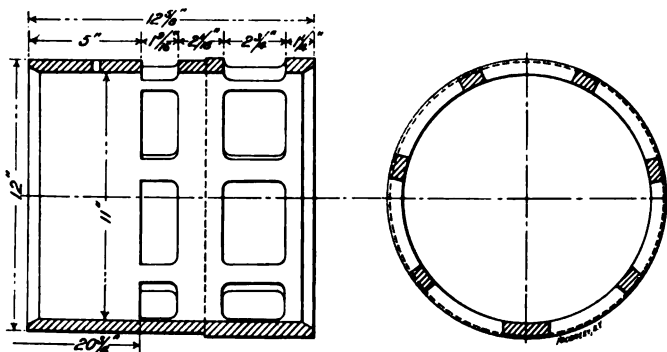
Valve Chest Bushing for Atlantic Type Locomotive
